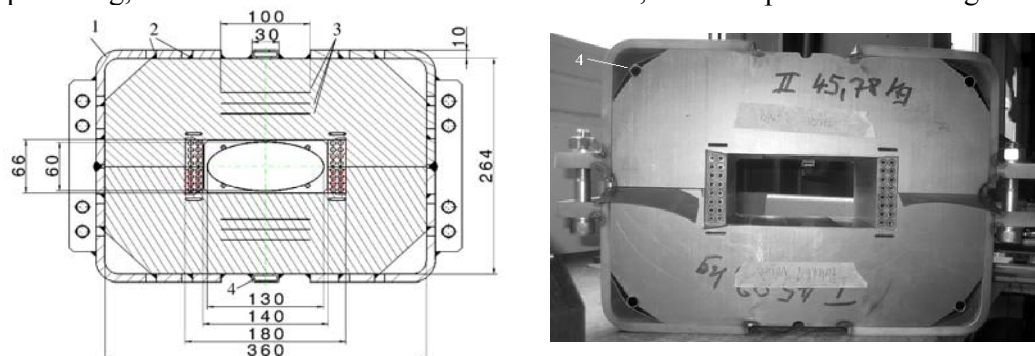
Cross section of the straight dipole design with vacuum chamber (left), and the corresponding mockup for technological tests of the yoke fabrication and the coil fixation (right). Stainless steel brackets - 1, welding fixation - 2, horizontal slits - 3, yoke cooling tubes - 4. The coil turns consist of two vertical layers of 8 turns each.
